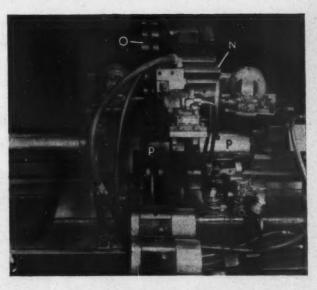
This automatic machine orientates and assembles outer and inner housings. Completed assemblies, ready to receive the pole pieces, are seen in the foreground
